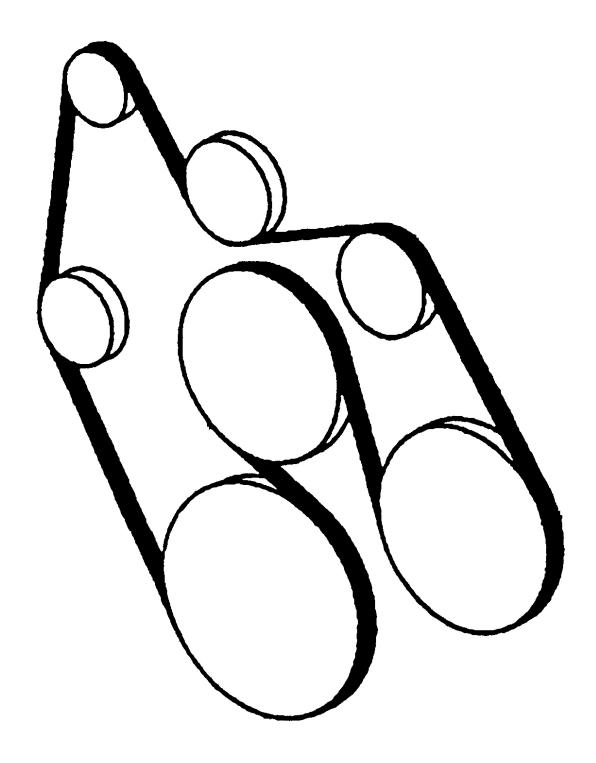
Drive Belt Routing - 2.2L (Without A/C, With Manual Steering) Courtesy of GENERAL MOTORS CORP.
